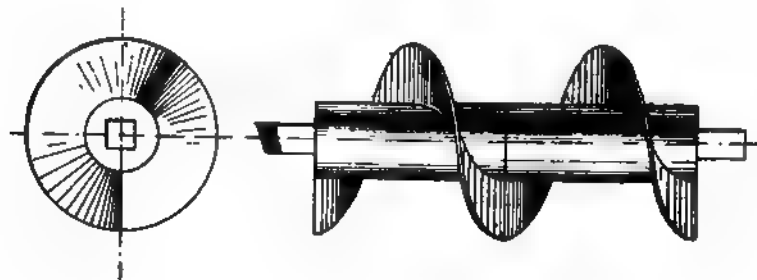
Worm Conveyor composed of Cast-iron Plates and fitted with Square Spindle.
